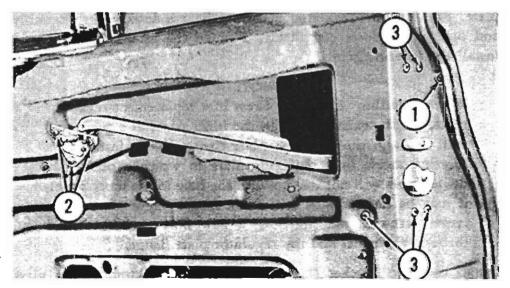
Remove Lock Assembly, Remote Control Link, and Outer Handle By Taking Out Screws Indicated.
